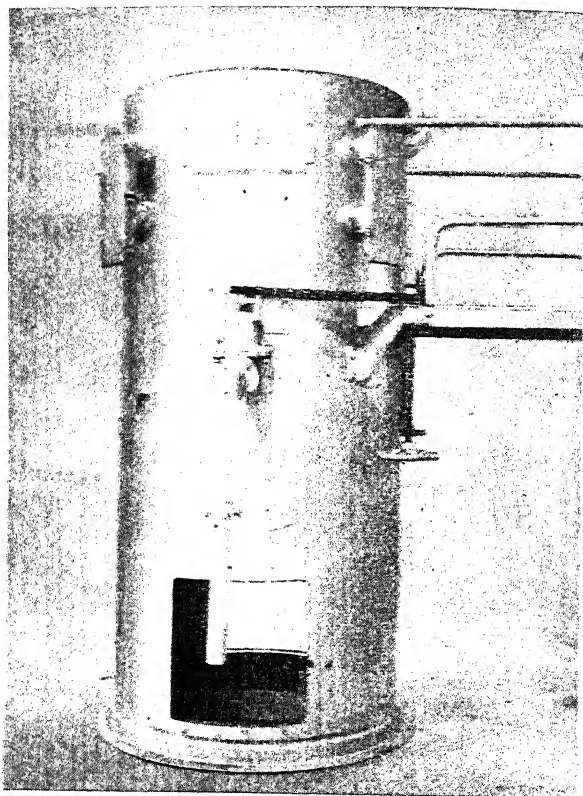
OIL-FIRED FURNACE FOR SPELTER
